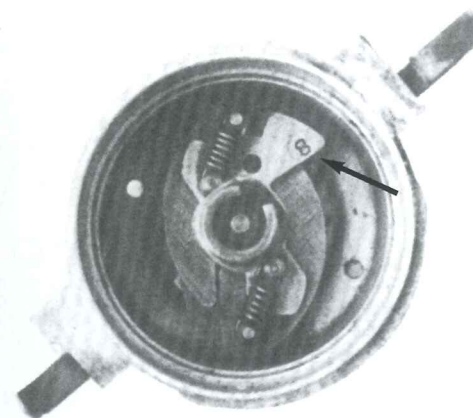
Bob weights at rest. N.B. The 8 stamped on the cam plate indicating the most possible advance on this 1500 distributor to be 16°
